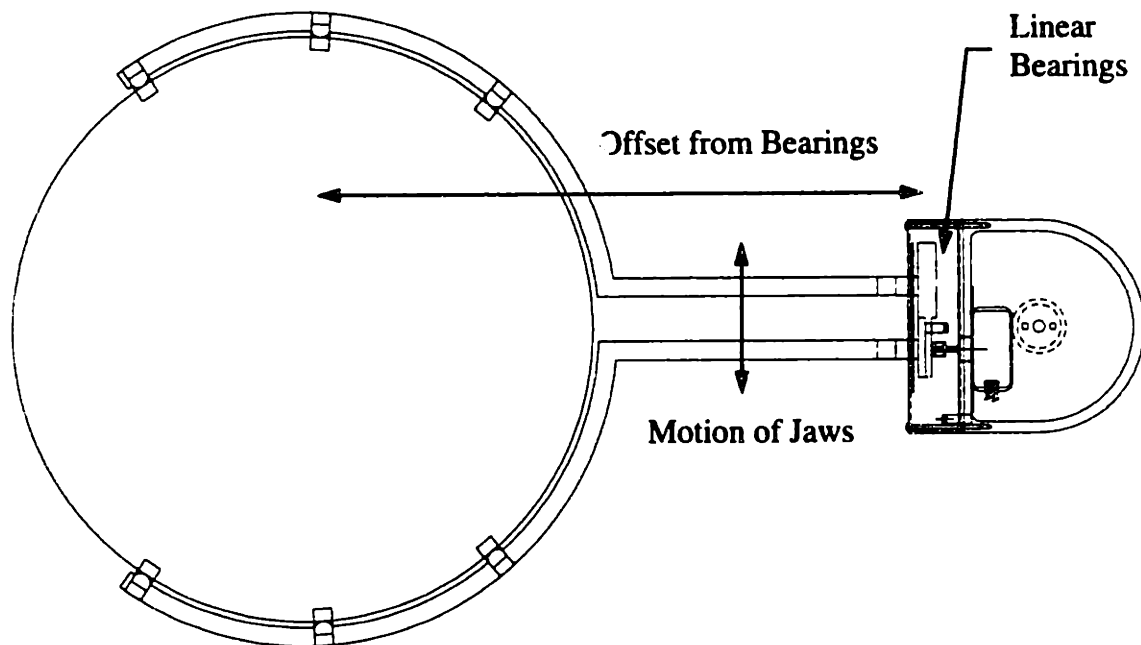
Fork-type gripper showing Abbe error caused by bearing offset⁴².
